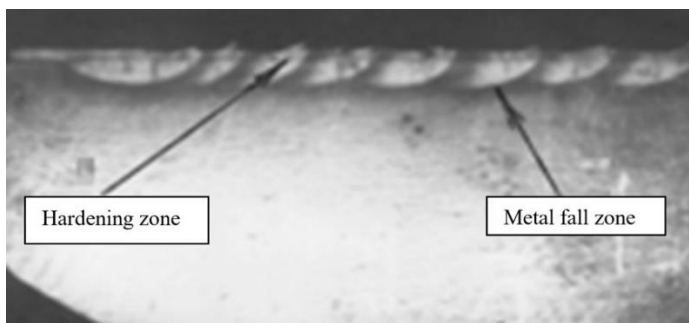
Macrostructure of the part with the coating obtained using electro-contact welding of steel woven gauze.
